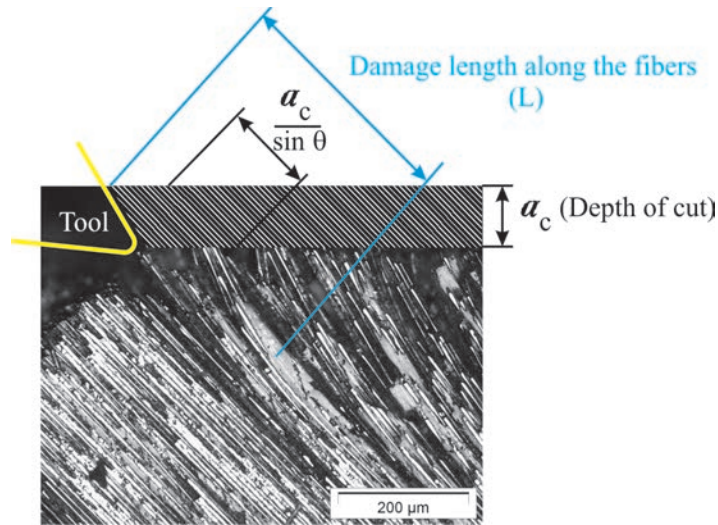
Damage residue after edge trimming of unidirectional composites
